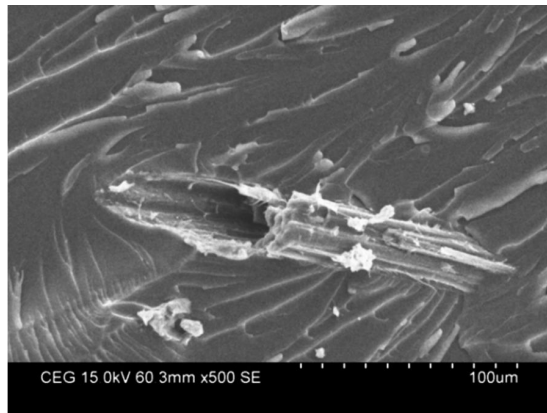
SEM of flexural fracture surface showing 5K/5C showing fibre pullout
